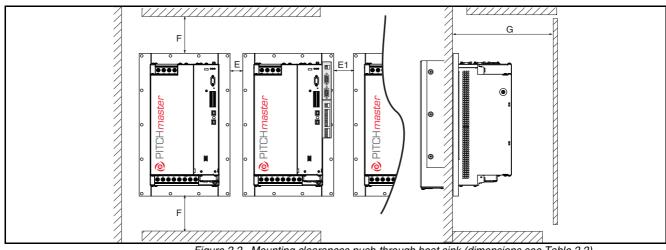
Mounting clearances push-through heat sink (dimensions see Table 2.2)
